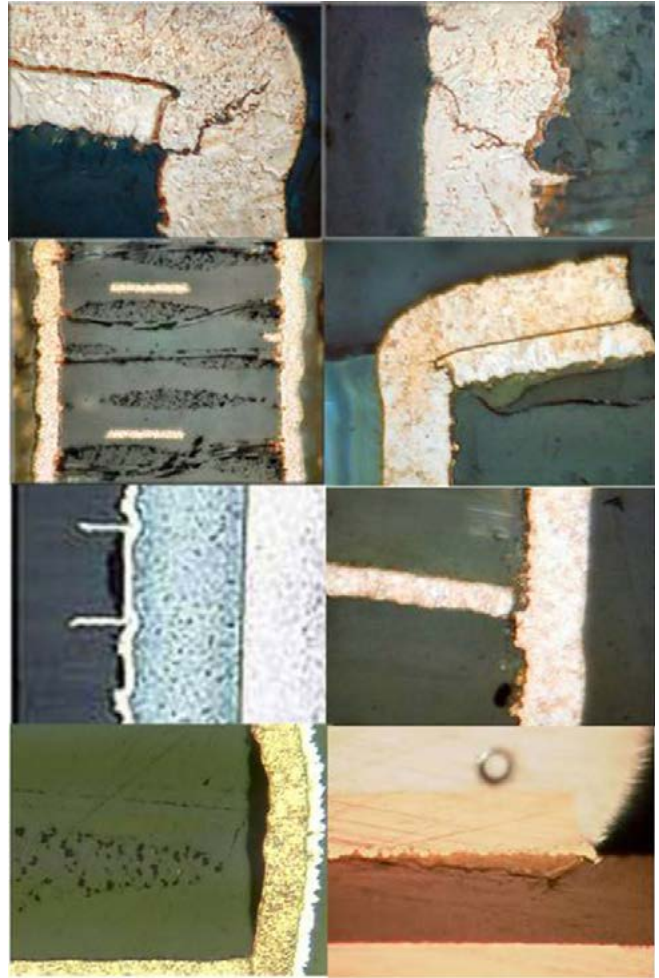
Cross-sectional micrographs of printed circuit defects caused by soldering are provided above. Clockwise from the upper left-hand corner: corner crack, barrel crack, pad lifting, post separation, pad cratering, hole wall pull away, resin recession and delamination.
